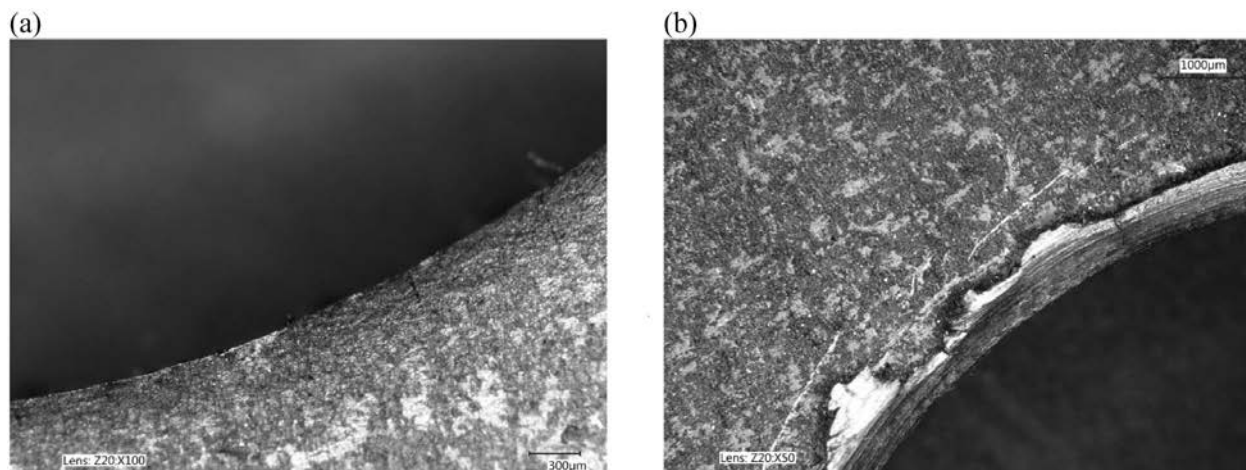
A view of the specimen surface with a hole pierced (a) and drilled (b) at the stage of cracking initiation
